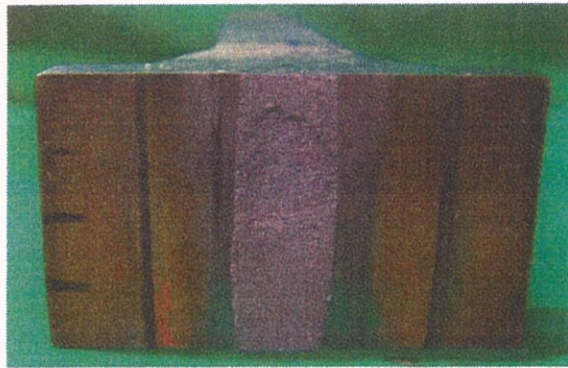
Fracture surface after tensile fracture toughness test (TCI-4, -119°C)
